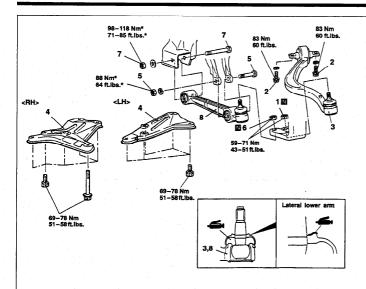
lower ball joint-to-steering knuckle junctions
